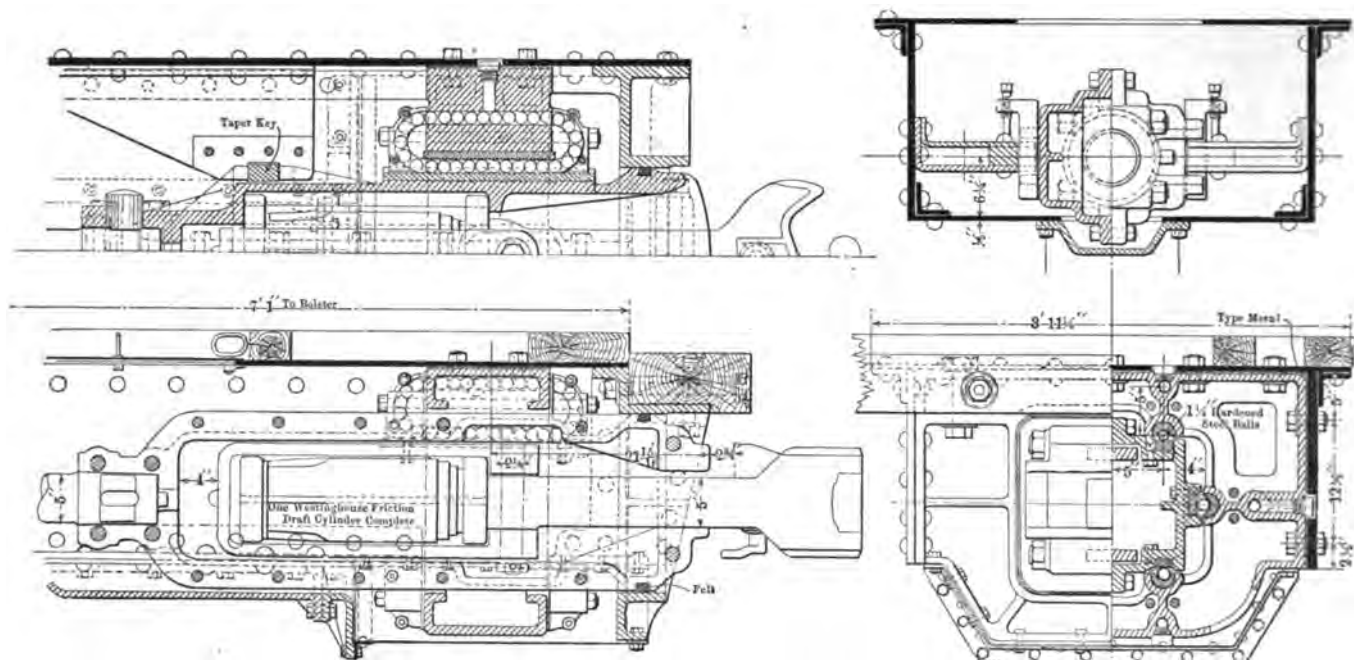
DRAFT GEAR HOUSING AND END OF CENTER SILL—PENNSYLVANIA R. R. DYNAMOMETER CAR.
